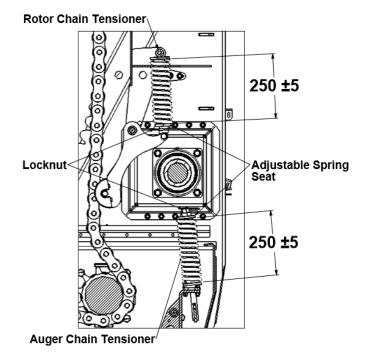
Rotor and auger chain tension spring setting (1000 RPM driveline)
